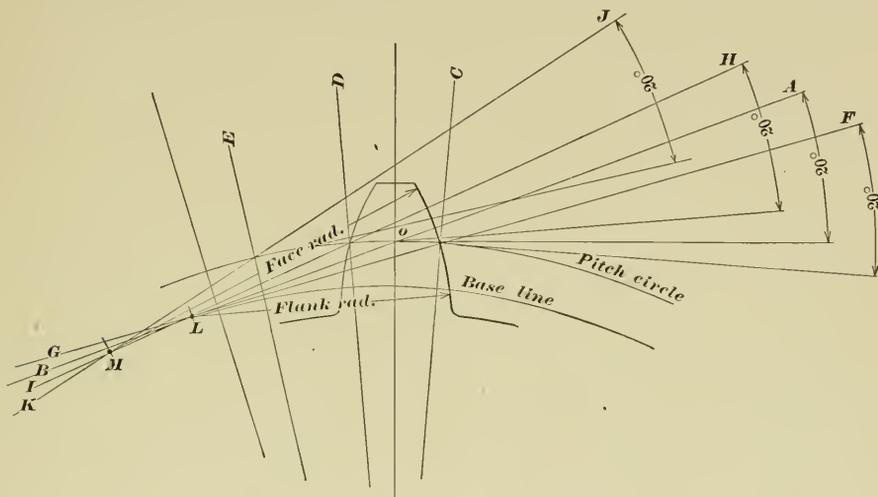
Approximate Method of Drawing 20° Involute Tooth
